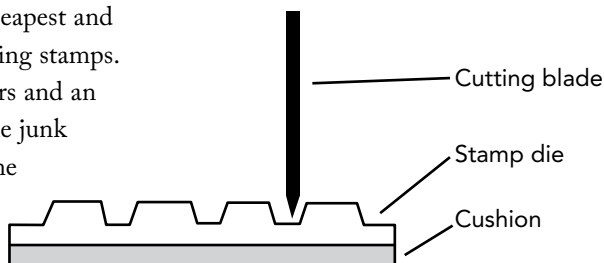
Pneumatic die cutter blade in its resting position. Notice how the cutting edge of the blade is below the level of the stamp printing surface.
